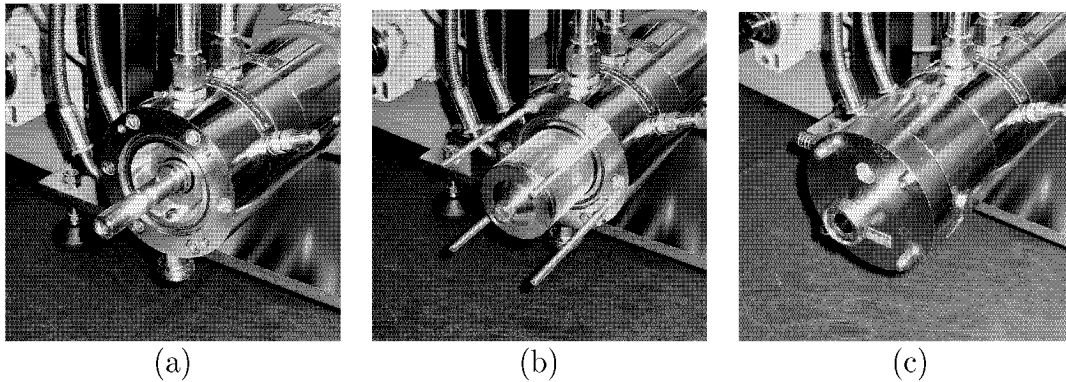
Assembly of the ROME foaming head. (a) hollow shaft, (b) ROME head with membrane and stator screws, (c) completely assembled ROME head.
